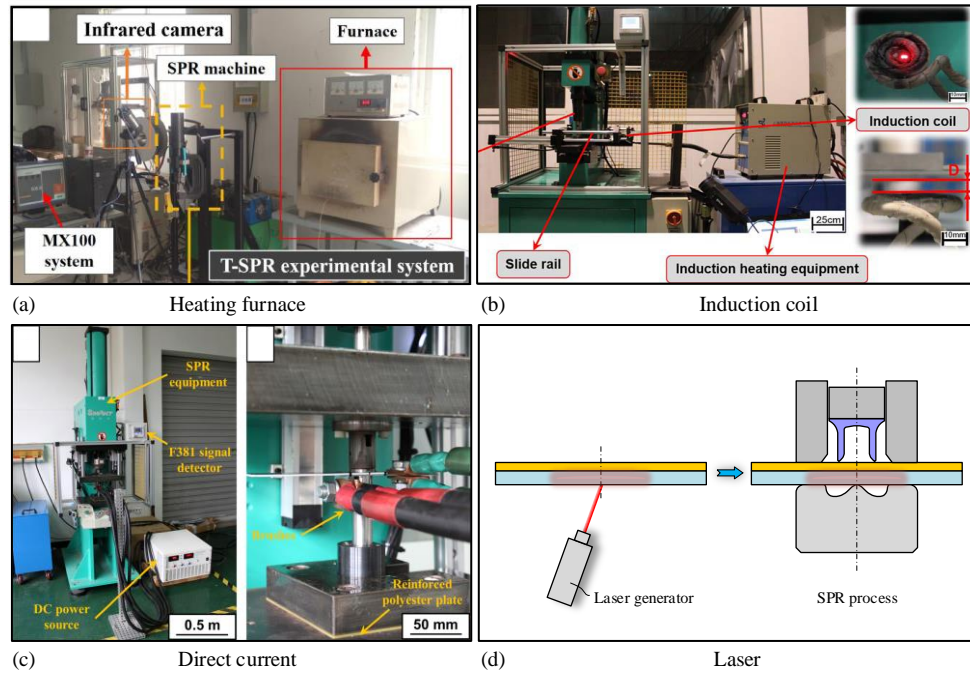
Assistant technologies to improve the ductility of bottom sheet material (a) heating furnace [52], (b) induction coil [65], (c) direct current [66] and (d) laser [51]
